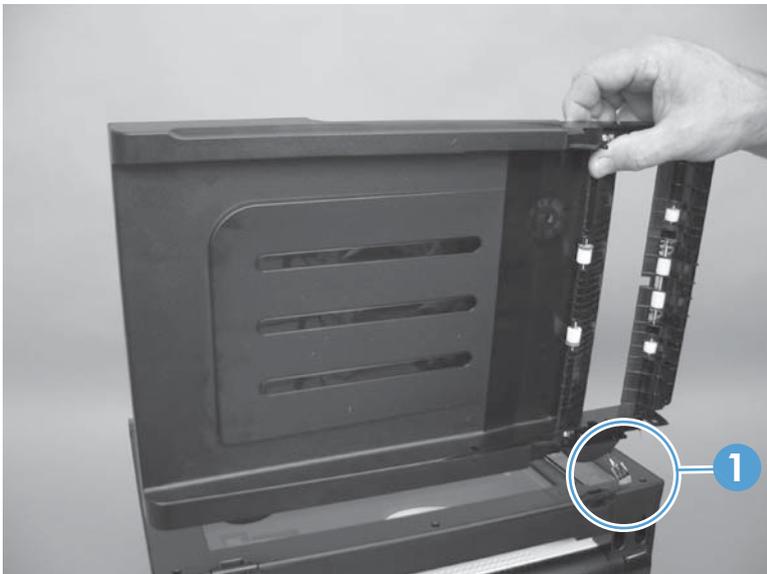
Remove the document feeder base assembly (2 of 3)
